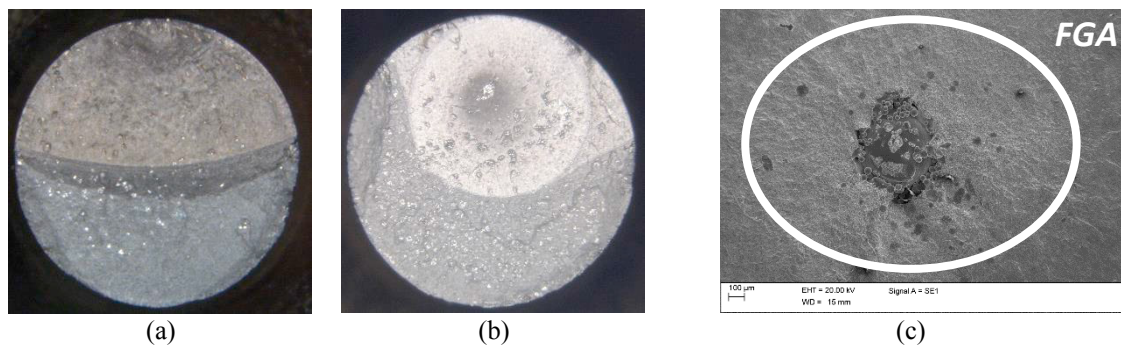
Example of fracture surfaces found experimentally: (a) failure form surface defect; (b) fish-eye morphology; (c) magnification of the initial defect surrounded by the Fine Granular Area (FGA).
